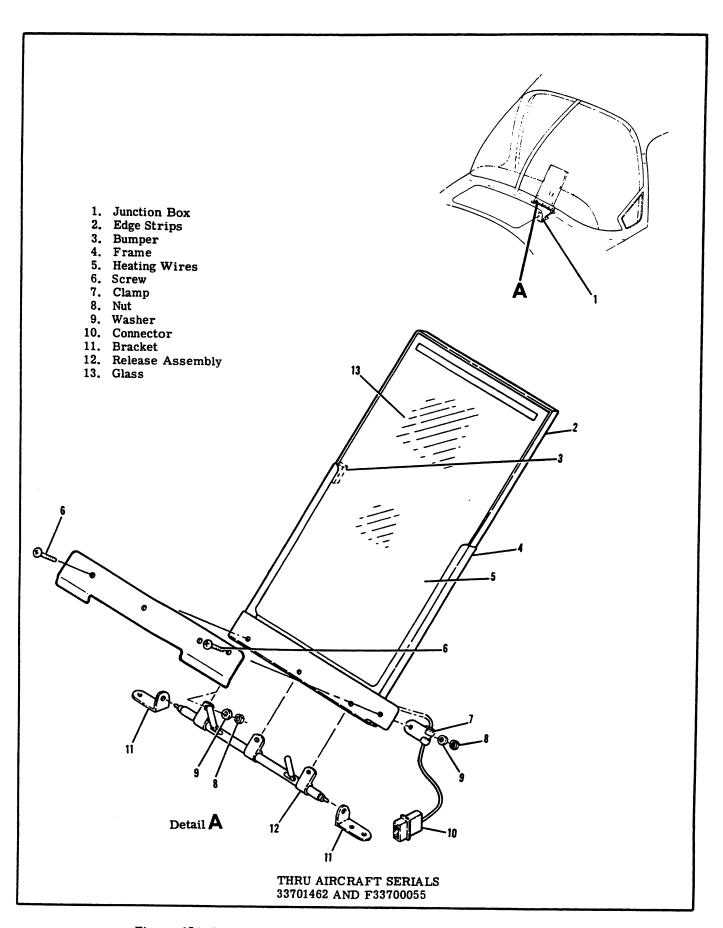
A-19. Windshield Anti-Ice Panel Installation (Sheet 1 of 2)
